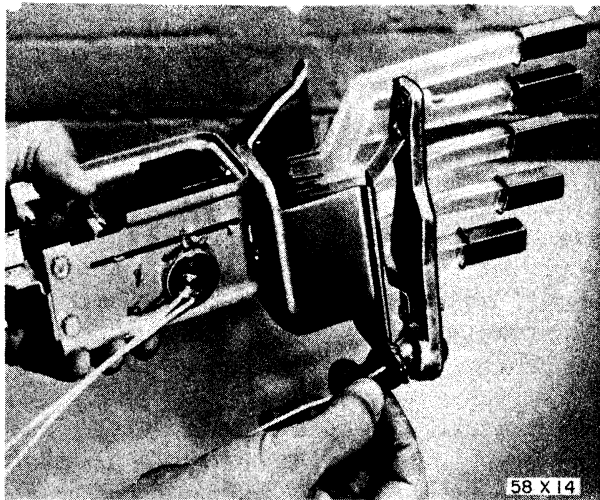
Illuminating Lamp Bulb Installation—Imperial Models
